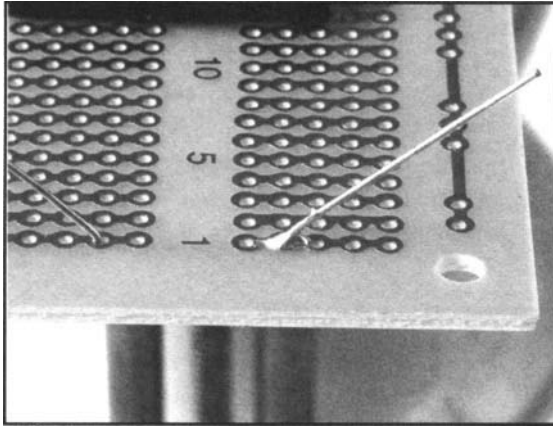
Resistor Inserted into PCBFigure 2.28 Heating the Desired Solder ConnectionFigure 2.29 Applying Heat and Solder to the Connection
